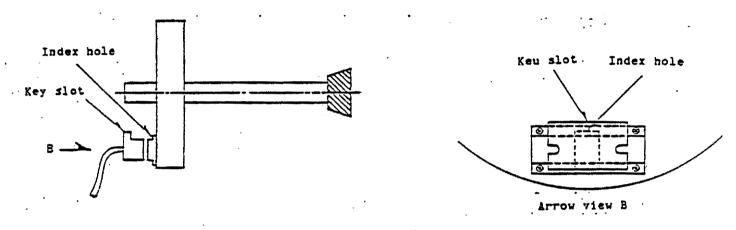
Mounting onto a flat surface on the non-load side of the rotating body
